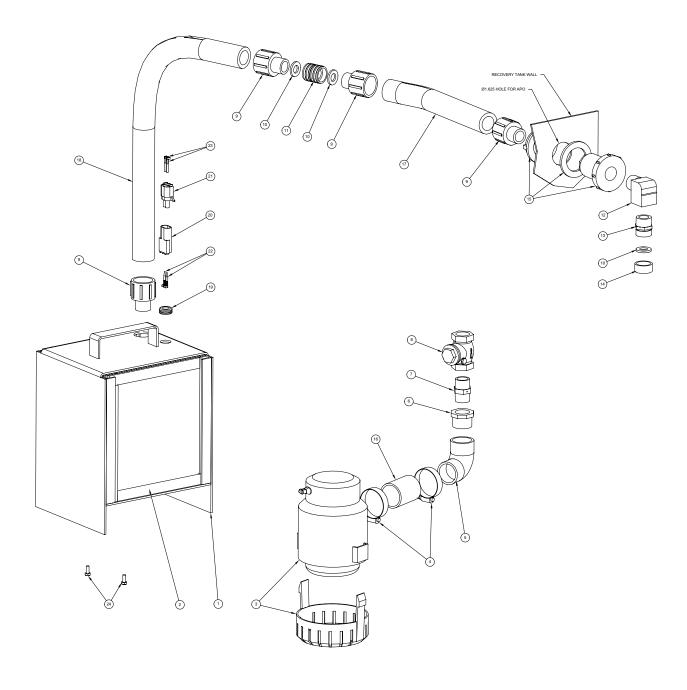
Recovery Tank Cover Assembly C-2704 Rev F
